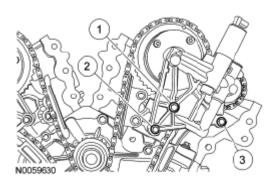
Locating VCT Housing Seals Courtesy of FORD MOTOR CO.
